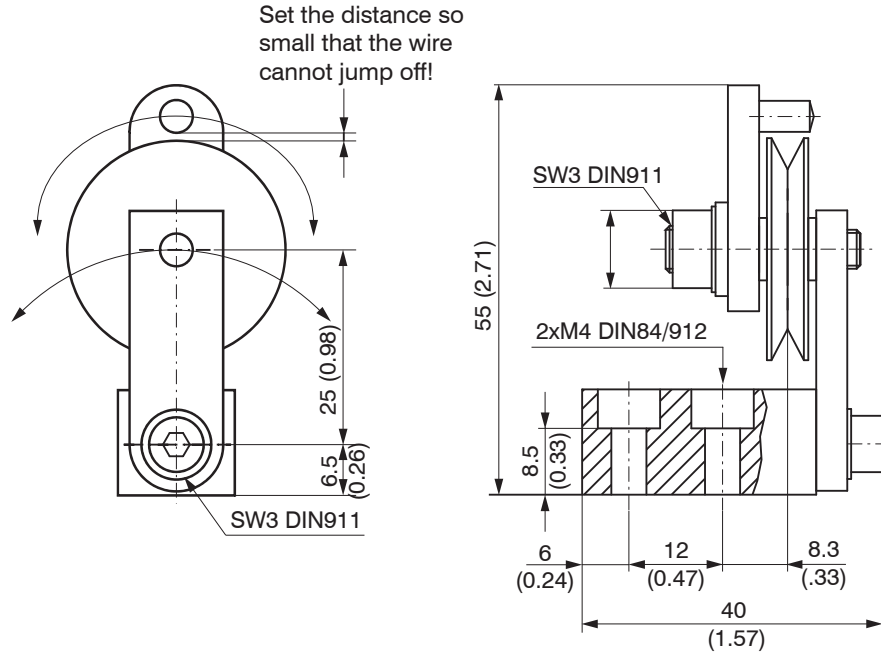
Deflection pulley TR1-WDS with mounting foot, dimensions in mm (inches)
